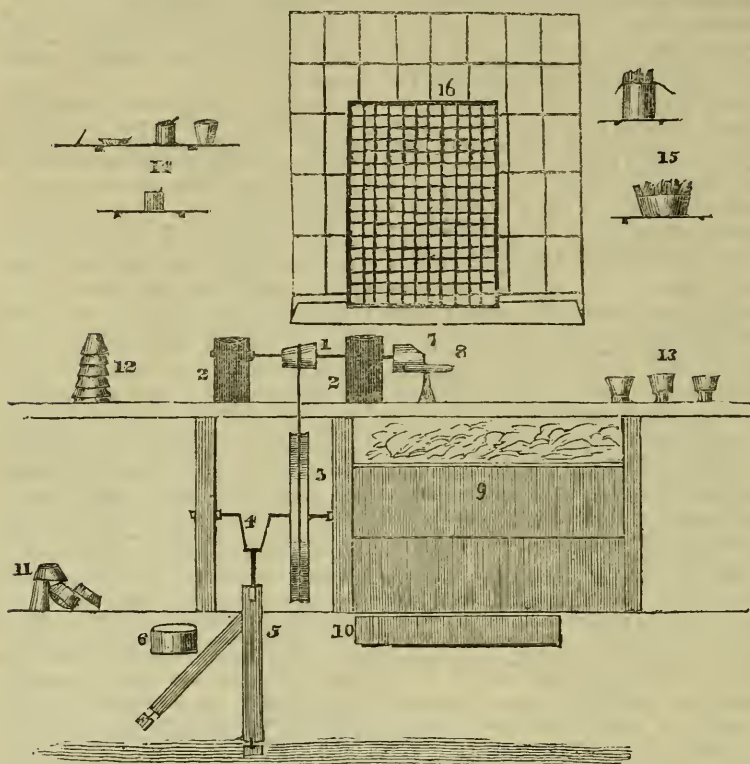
, a lathe: 1, the spindle; 22, up-rights, in which the spindle moves; 3, the wheel; 4, the crank; 5, the traddle; 6, a step for the lathe-treader to stand upon; 7, the chuck; 8, the rest; 9, a box for holding the cuttings which come off the pots, called the shaving-box; 10, a board
